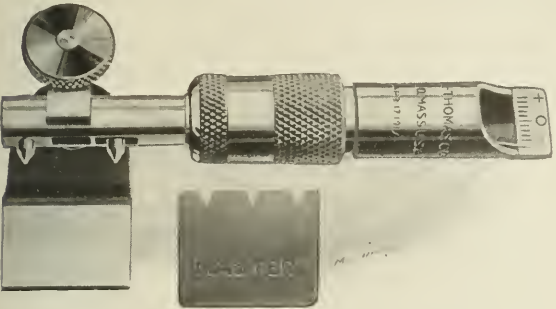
Thread Lead Indicator and "Master" made by Bicknell-Thomas Co.
